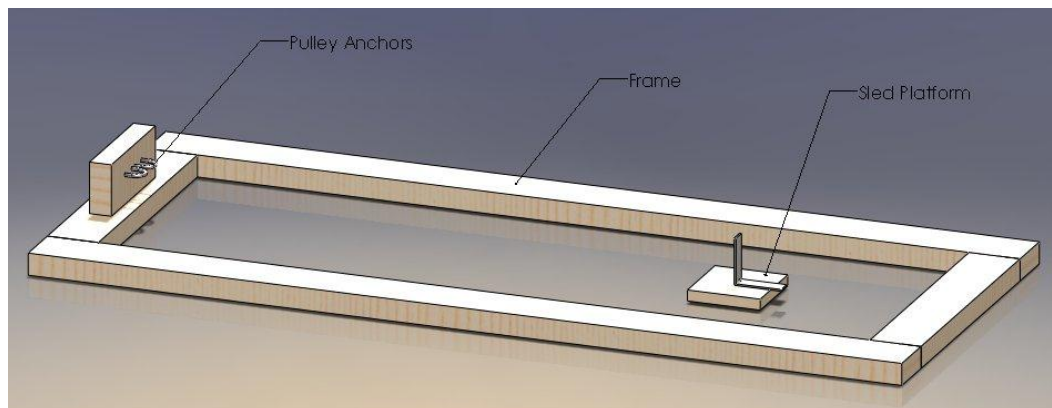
SolidWorks model of the manufactured parts for the friction testing apparatus.
